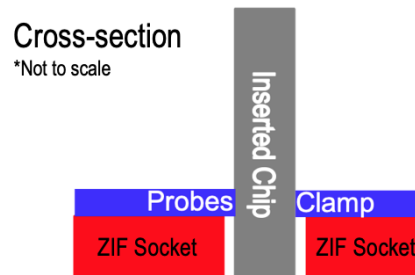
A cross-section of the final ZIF socket and motor chip assembly.
